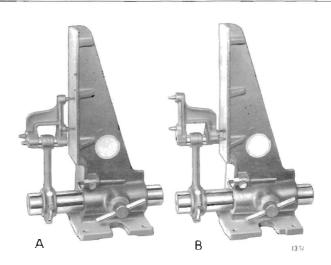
Checking connecting rod for bend and twist — using tool No. S336-3
